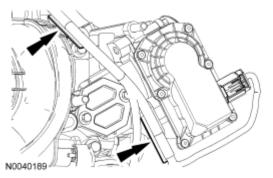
Locating Wiring Harness Pin-Type Retainers From Intake Manifold Courtesy of FORD MOTOR CO.
